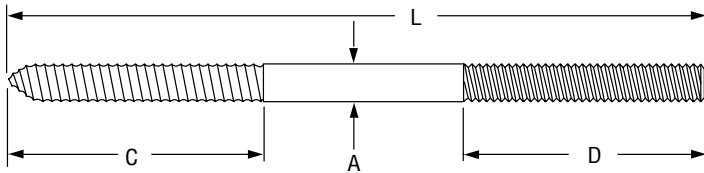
STANDARD THREAD LENGTHS (IN) • LOADS (LBS)
